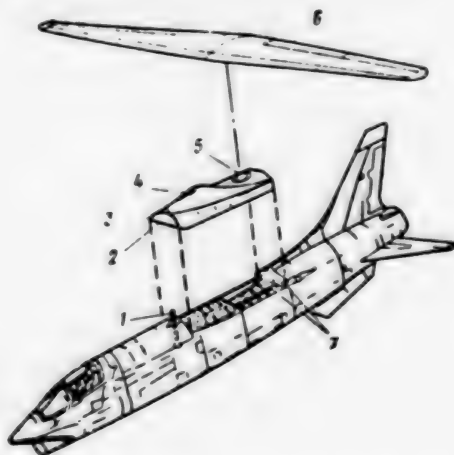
Modified components and assemblies of the F-8 experimental aircraft: 1 -- gear for changing established wing attack angle; 2 -- attachment mount for the gear for changing established wing attack angle; 3 -- wing supporting structure; 4 -- cowling; 5 -- hinged wing attachment mount; 6 -- "slanted" wing; 7 -- rear attachment mounts of wing support structure.
